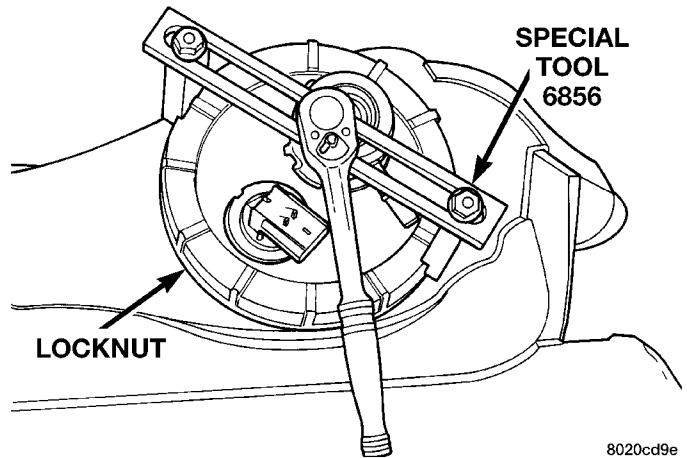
Fuel Reservoir Module Lock Nut Removal
